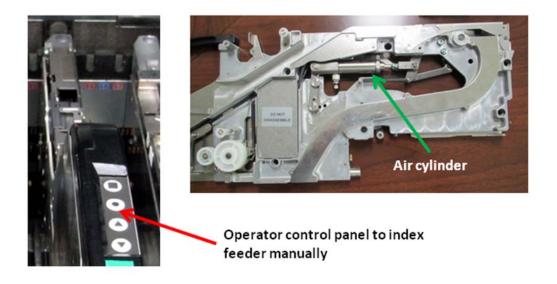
Examples of an electric feeder (left) and a pneumatic feeder (right) which are typically used in pick and place machines to advance the tape with LEDs.
